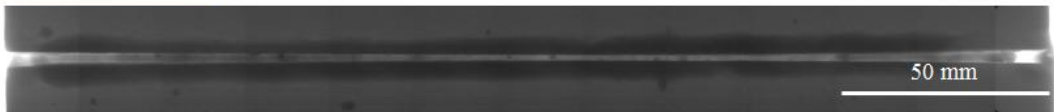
RT result of weld bead having 1.6mm gap and filled with slag pieces - 1
